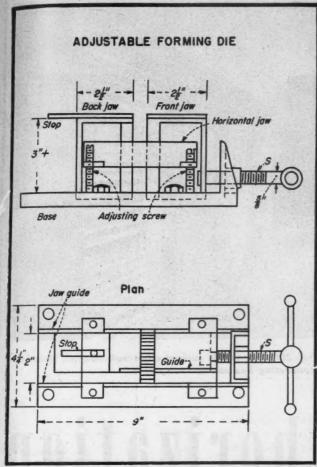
Elevation and plan views of adjustable die for forming operation.
